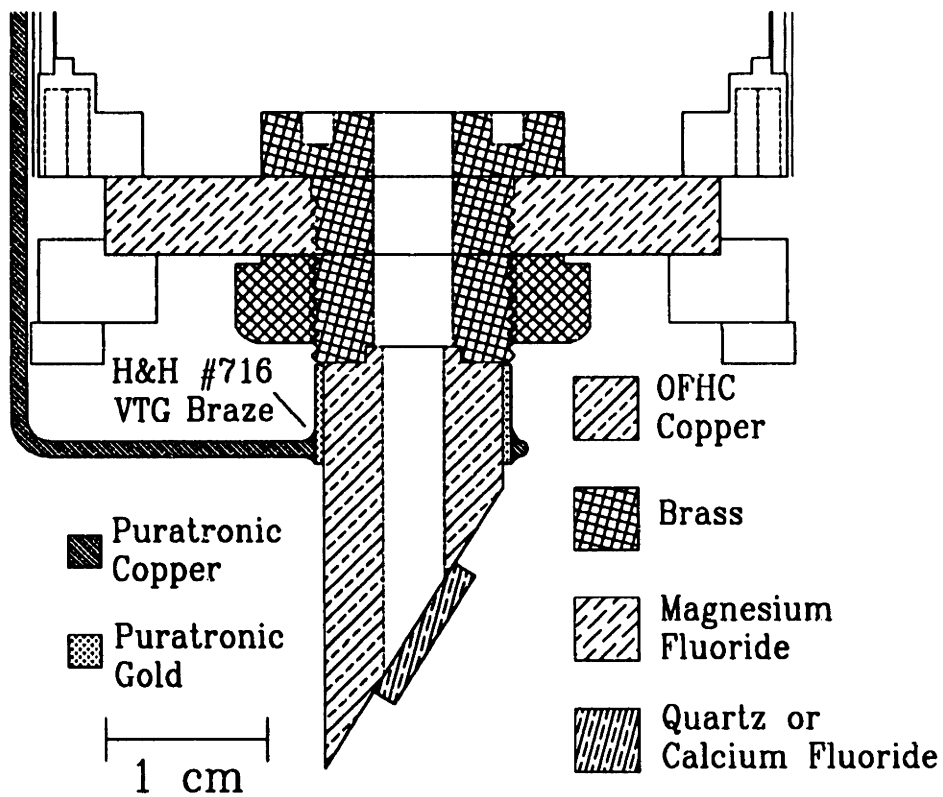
Lower Brewster window assembly (Handy & Harmon[66] braze designation is shown).
